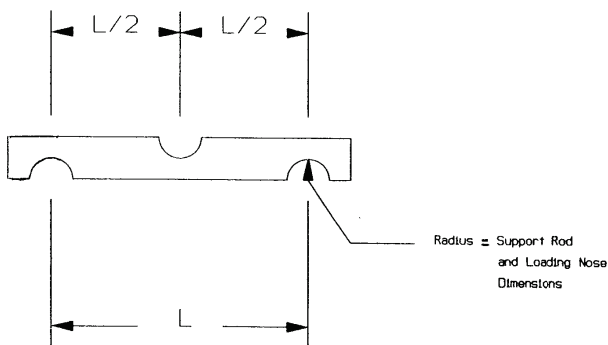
Fixture Used to Set Loading Nose and Support Spacing and Alignment
